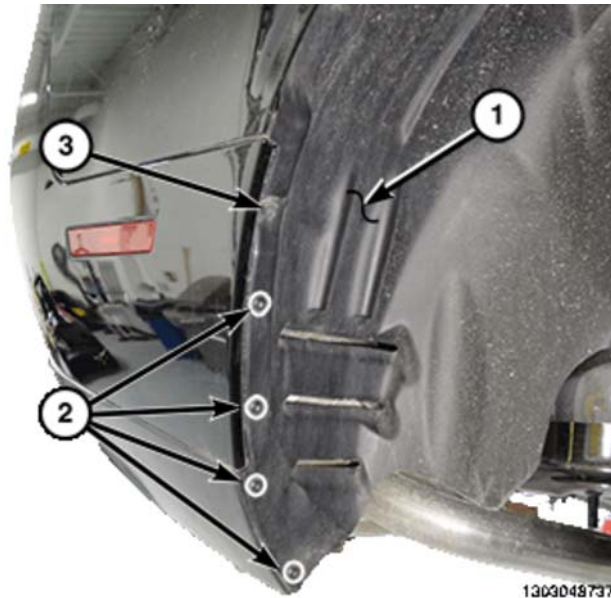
Lower Plastic Rivets, Splash Shield & Bolts
